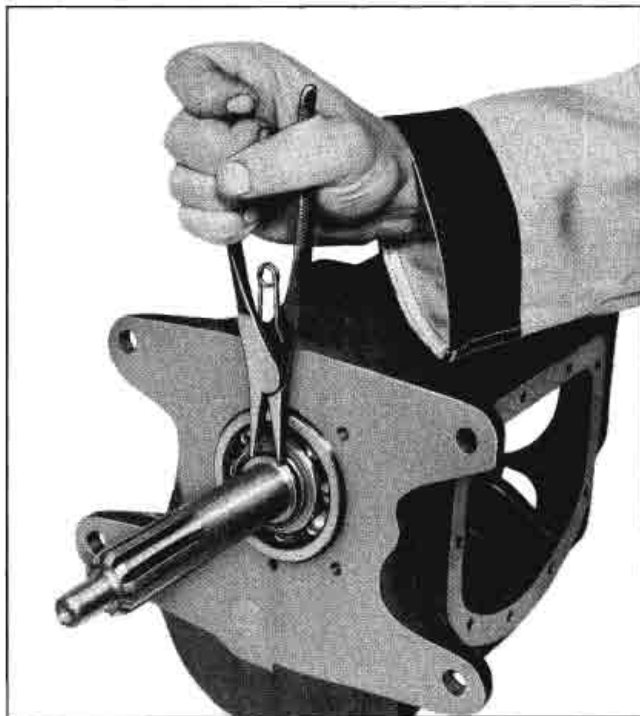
B-13 Removing or Replacing Main Drive Gear Snap Ring
